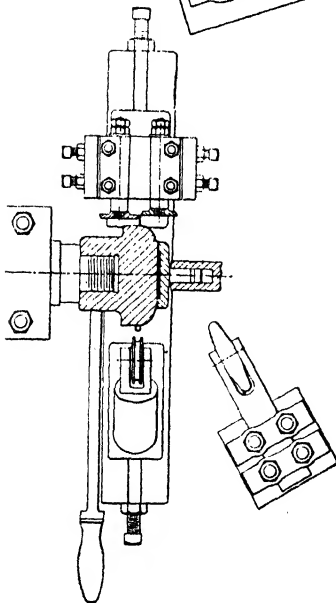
SPINNING, TRIMMING, AND BEADING ON ONE LATHE
